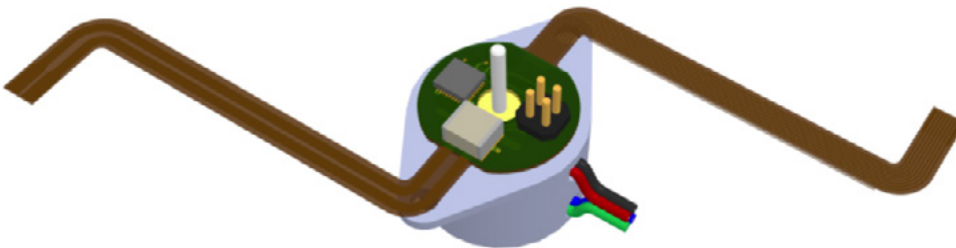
3D View of the Rotating Stepper Control Board. Longer "arms" would allow greater than 360° rotation of the motor and its control board
